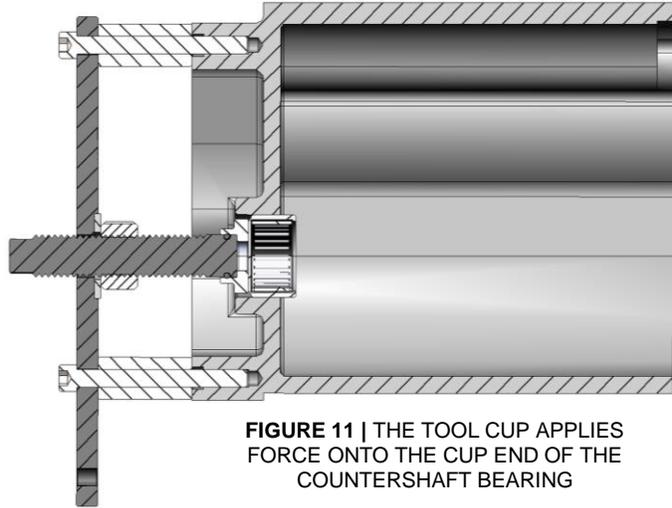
| THE TOOL CUP APPLIES FORCE ONTO THE CUP END OF THE COUNTERSHAFT BEARING
